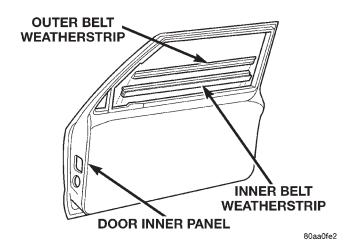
Front Door Inner/Outer Belt Weatherstrip
